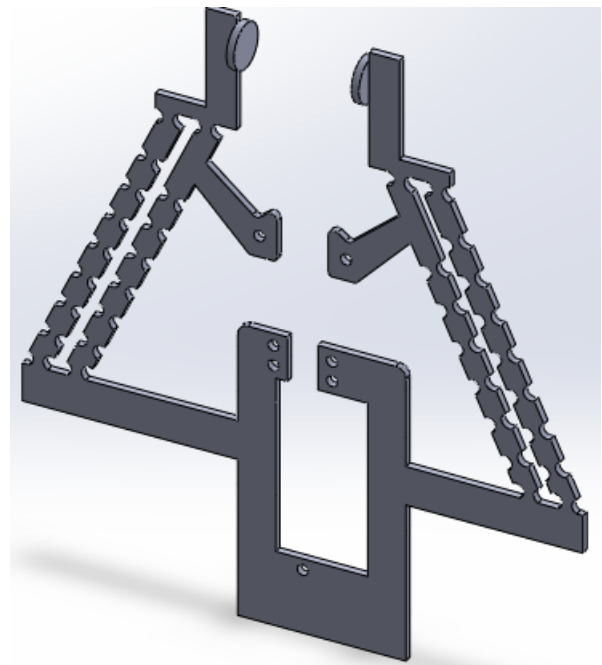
Modelled gripper with flexure joints for macroscale grasping
